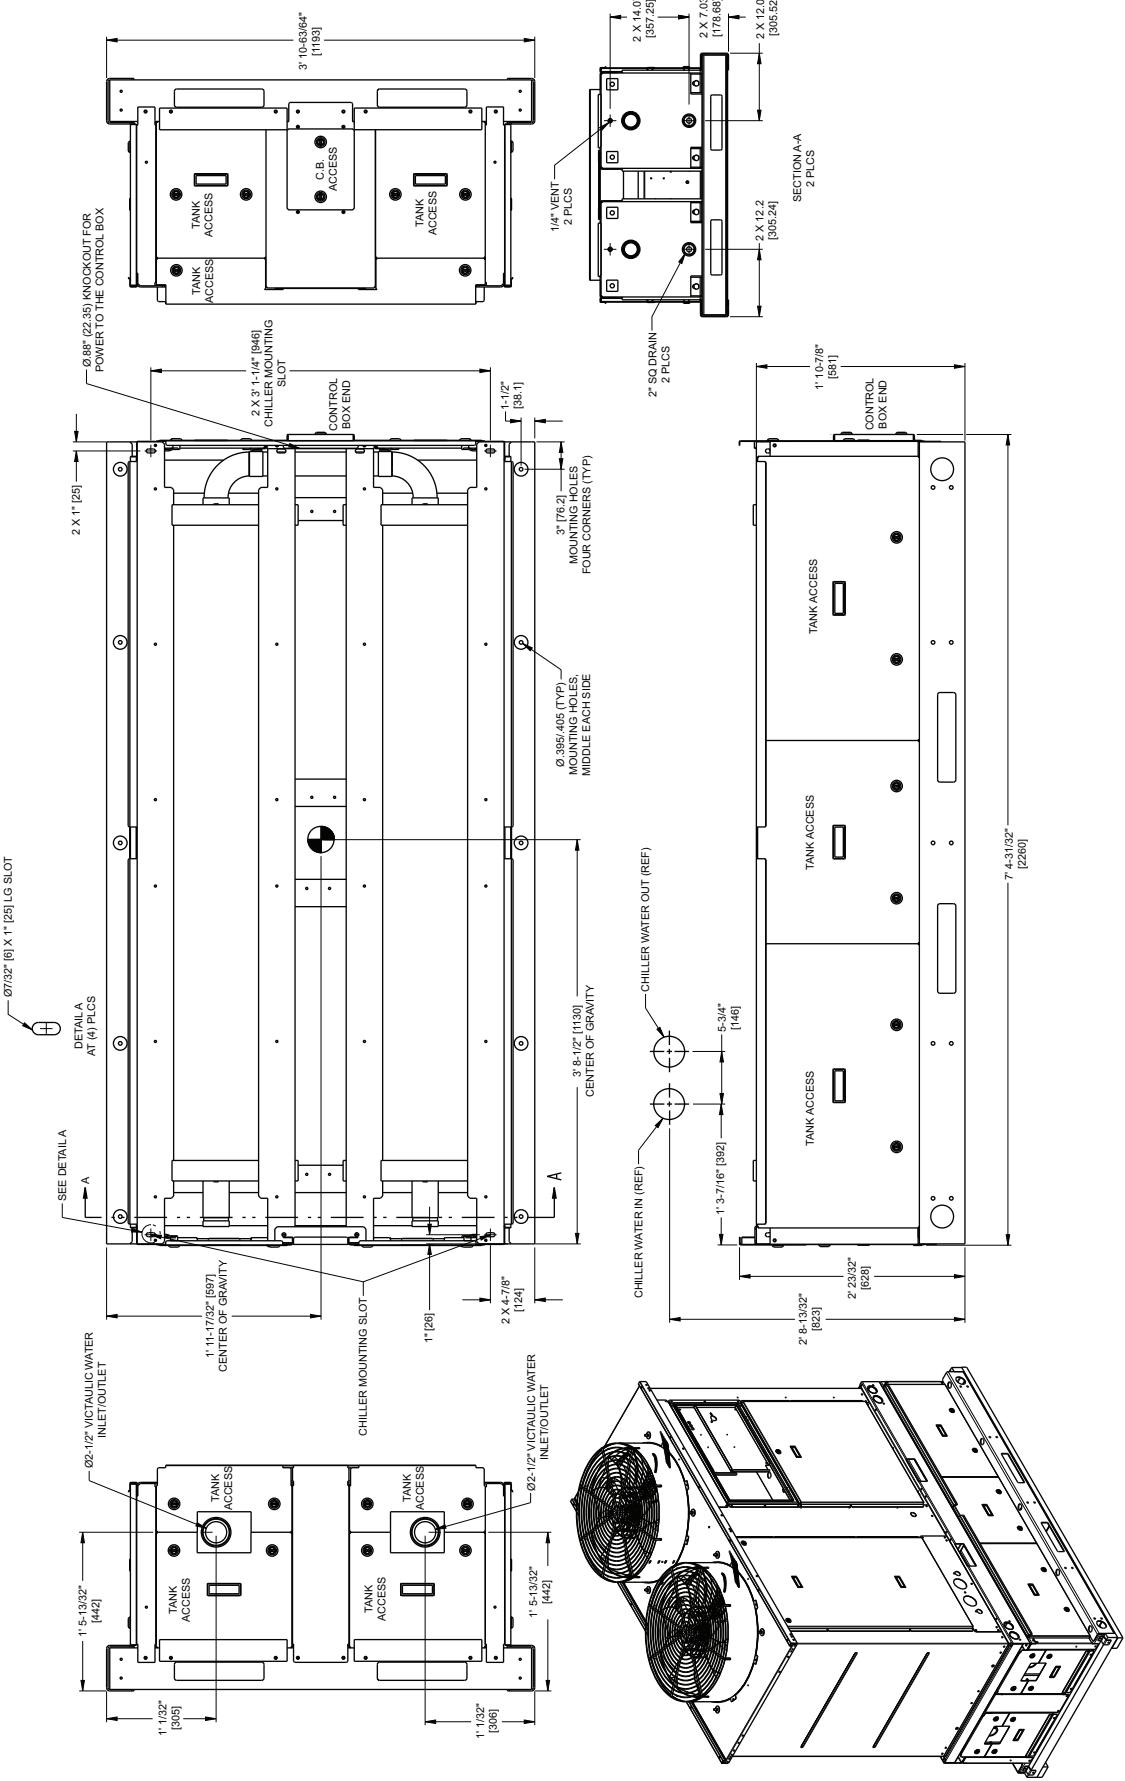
Accessory Storage Tank 30RA-900-051 Dimensions — 30RAP018-030 Units
